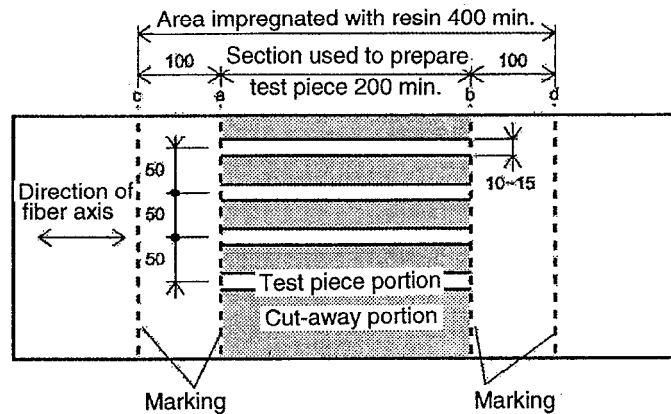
Dimensions of plate used to make Type B test specimens (unit: mm)
